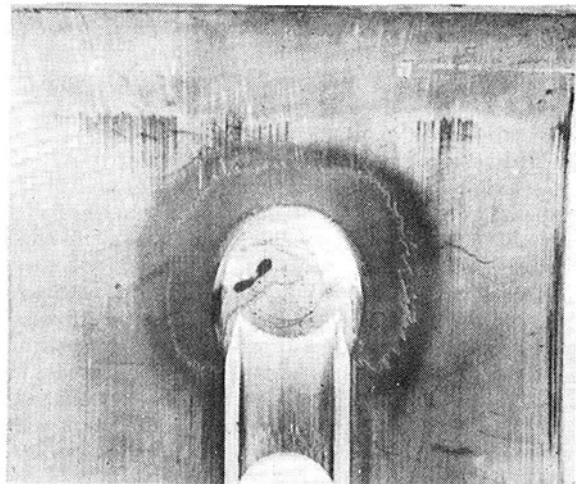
Cavitation damage at end of smoothly blended groove in large-end bearing
